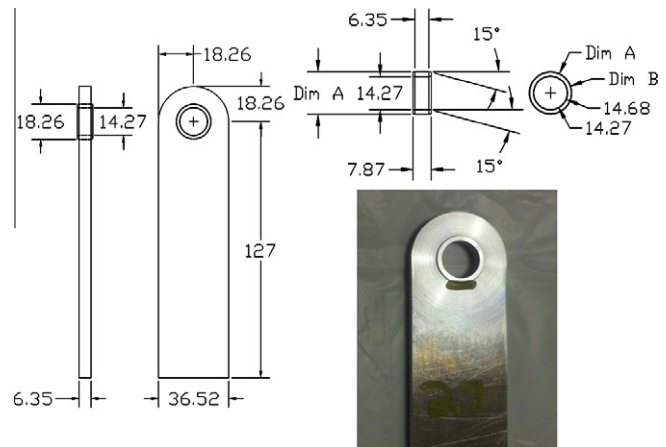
Fatigue test specimen, drawing and final assembly (dimensions in mm unless noted).
